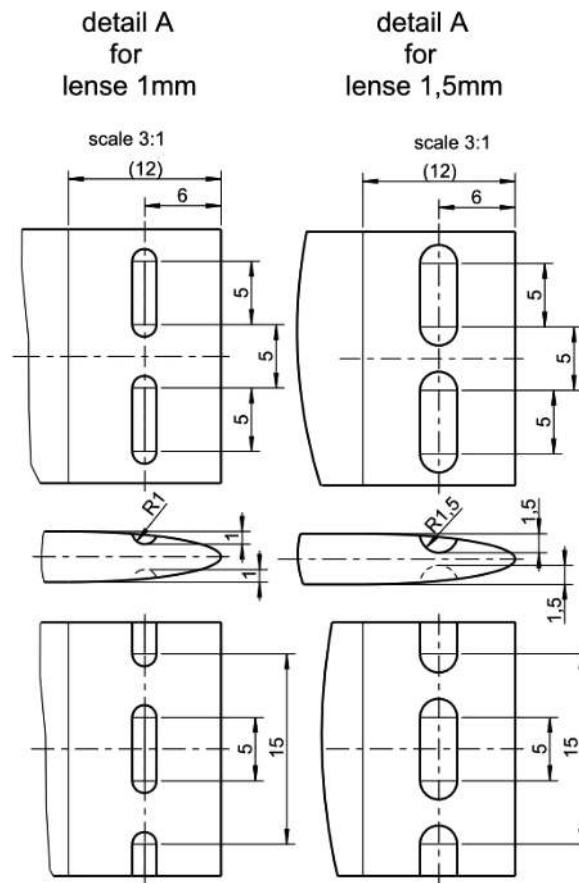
Geometry for specimen with lenses (1 mm and 1.5 mm)
